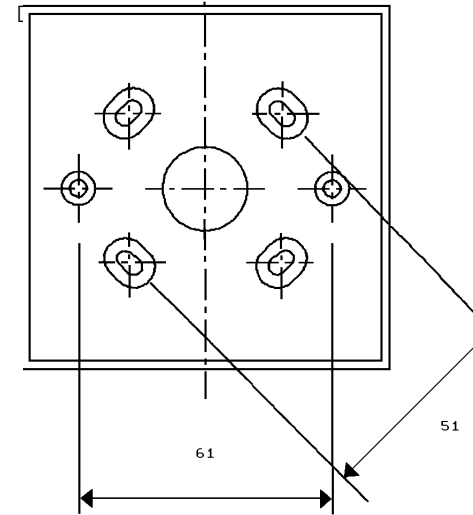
FC420CP-I Fixing Dimensions Surface Mount Backbox
